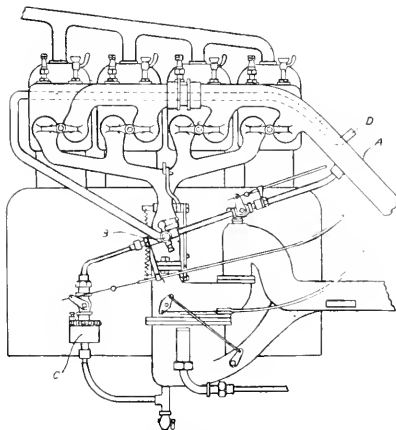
WILKINSON HEAVY-OIL-BURNING ARRANGEMENT FOR MOTOR CARS
